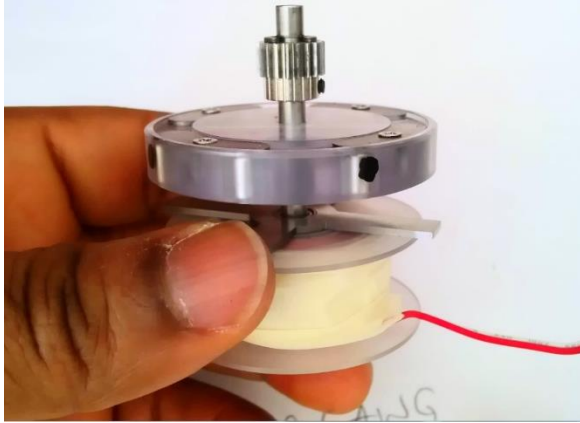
9 - Complete generator assembly: The Complete assembly showing the rotor, stator and a gear on the rotor shaft for connecting to other gears or a pulley.
